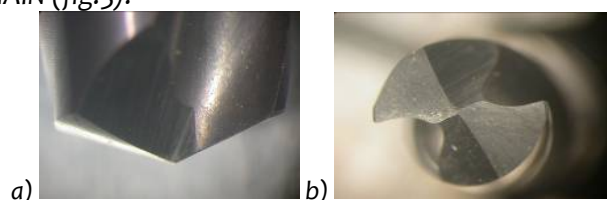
Photos of drilling tool a) back plane P_p , b) working reference plane P_r
